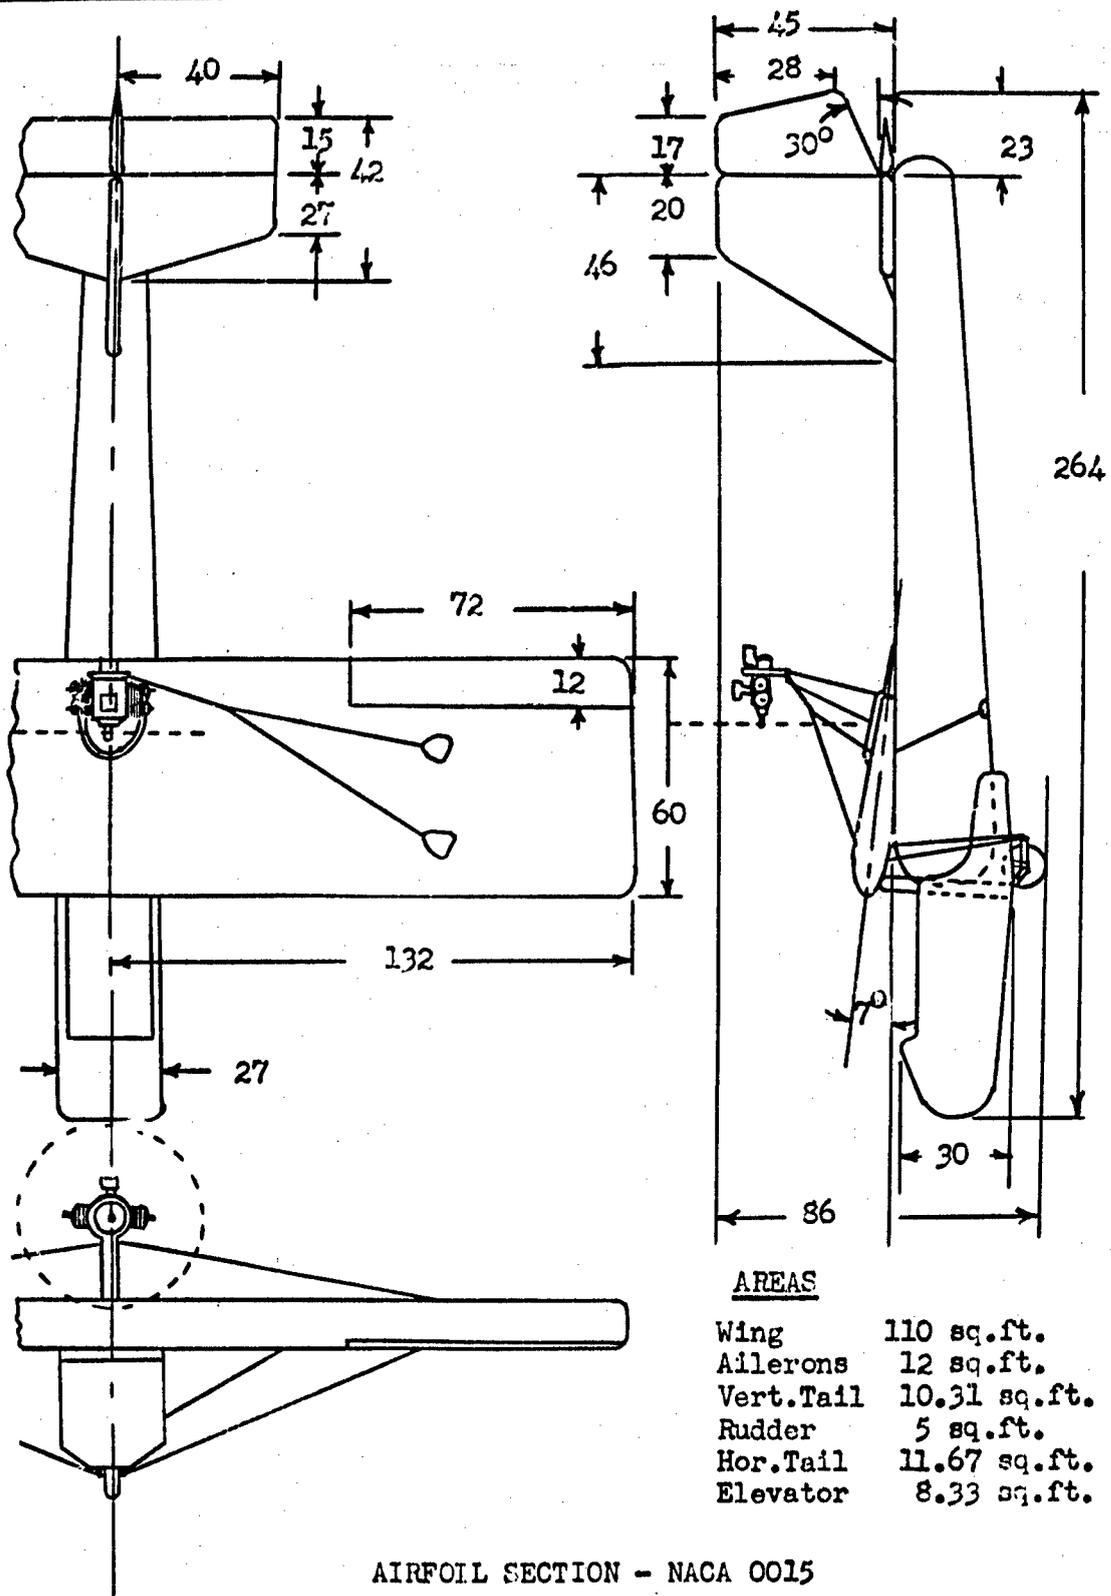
GA 468 INFLATOPLANE FINAL CONFIGURATION DIMENSIONS
